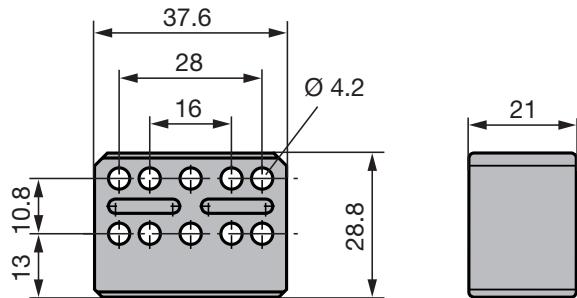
Installation dimensions of BTL6-A-3800-2 magnet
